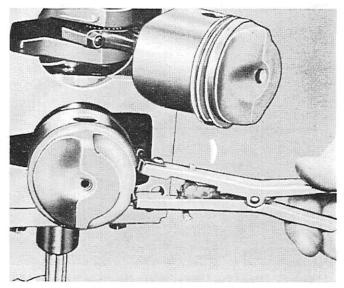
Removing (and Installing) Piston Rings Section II - Powerhead Master Service Manual
